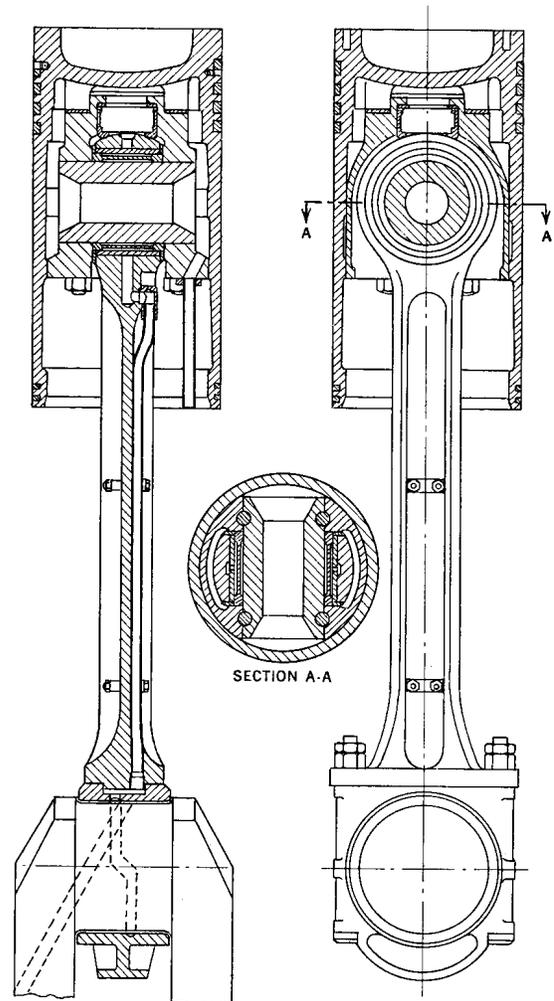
Assembly of Piston and Connecting Rod Petter Superscavenge Engine.
